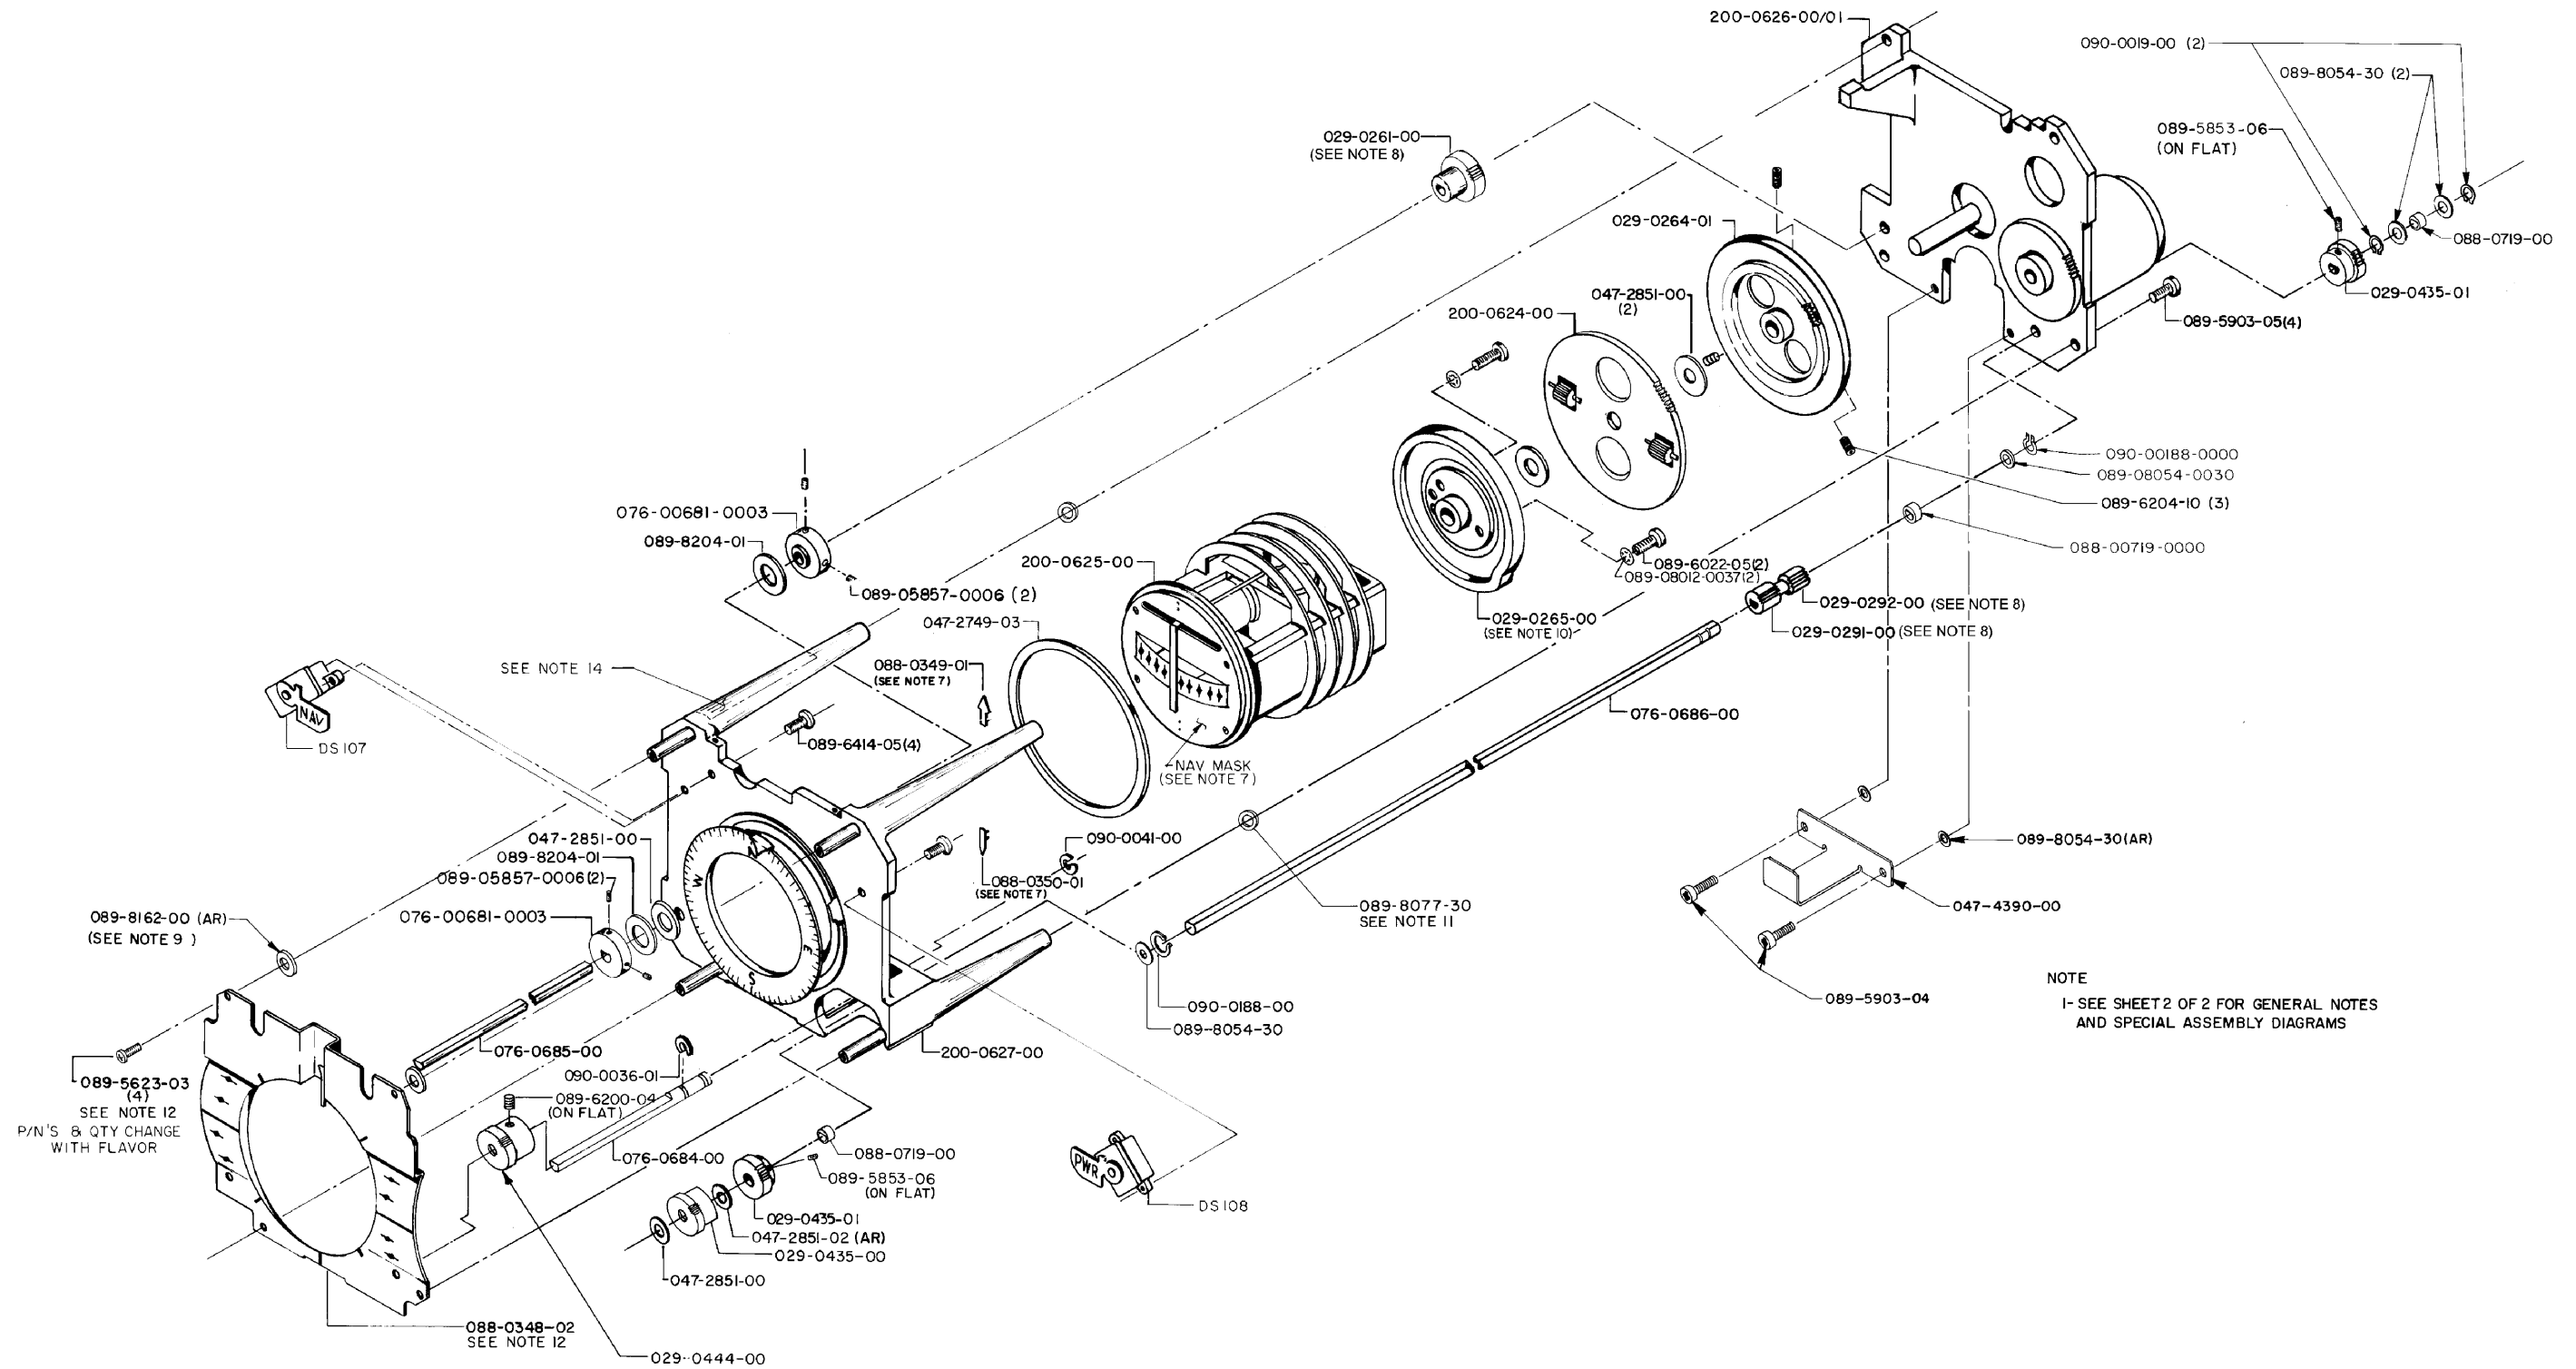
A KI 525 BEZEL ASSEMBLY
